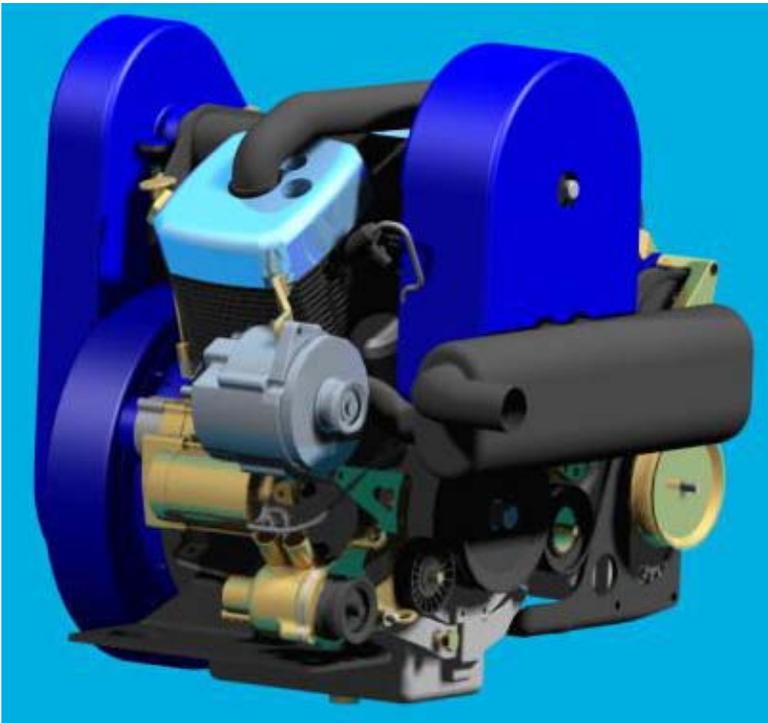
Compound Engine 999cc V Twin and conventional crankshaft
